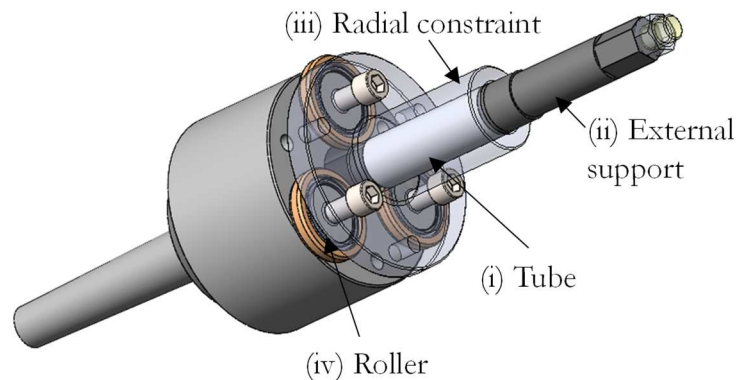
Assembly for the constrained backward tube flowforming.
